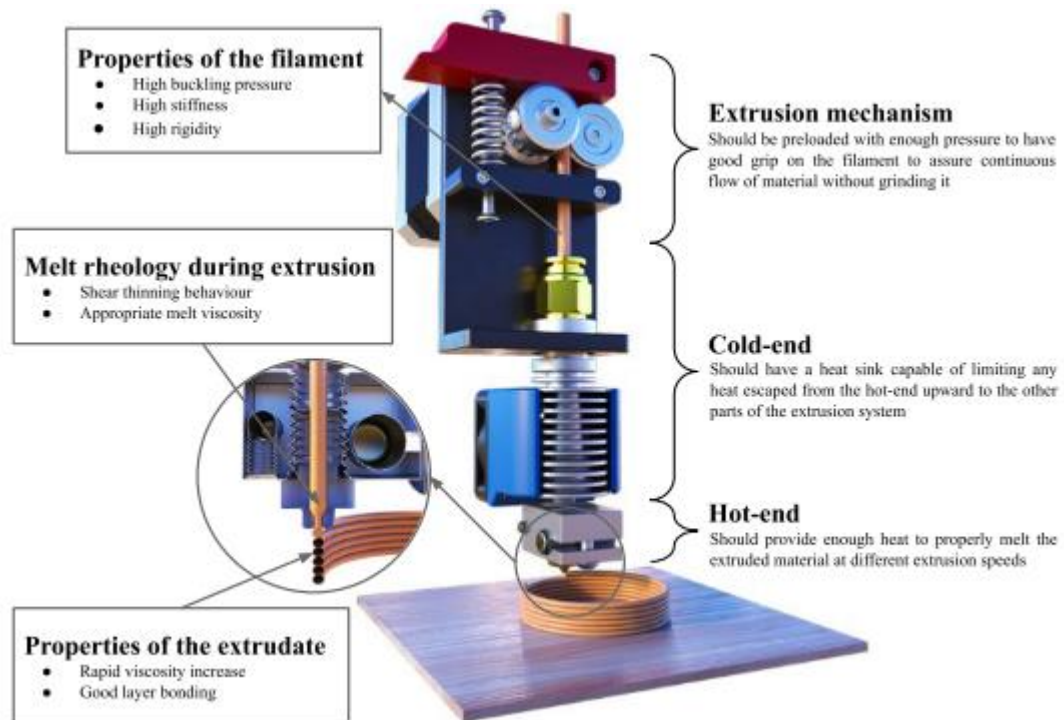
Detailed construction of a print head and required parameter for adequate material extrusion [74].
